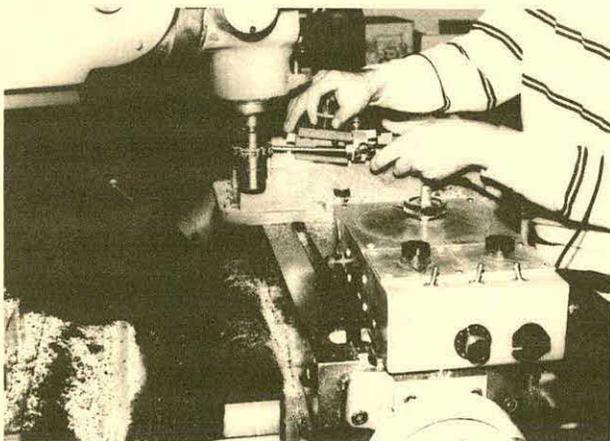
Machinist Setting Up Mill With Electronic Gauge
